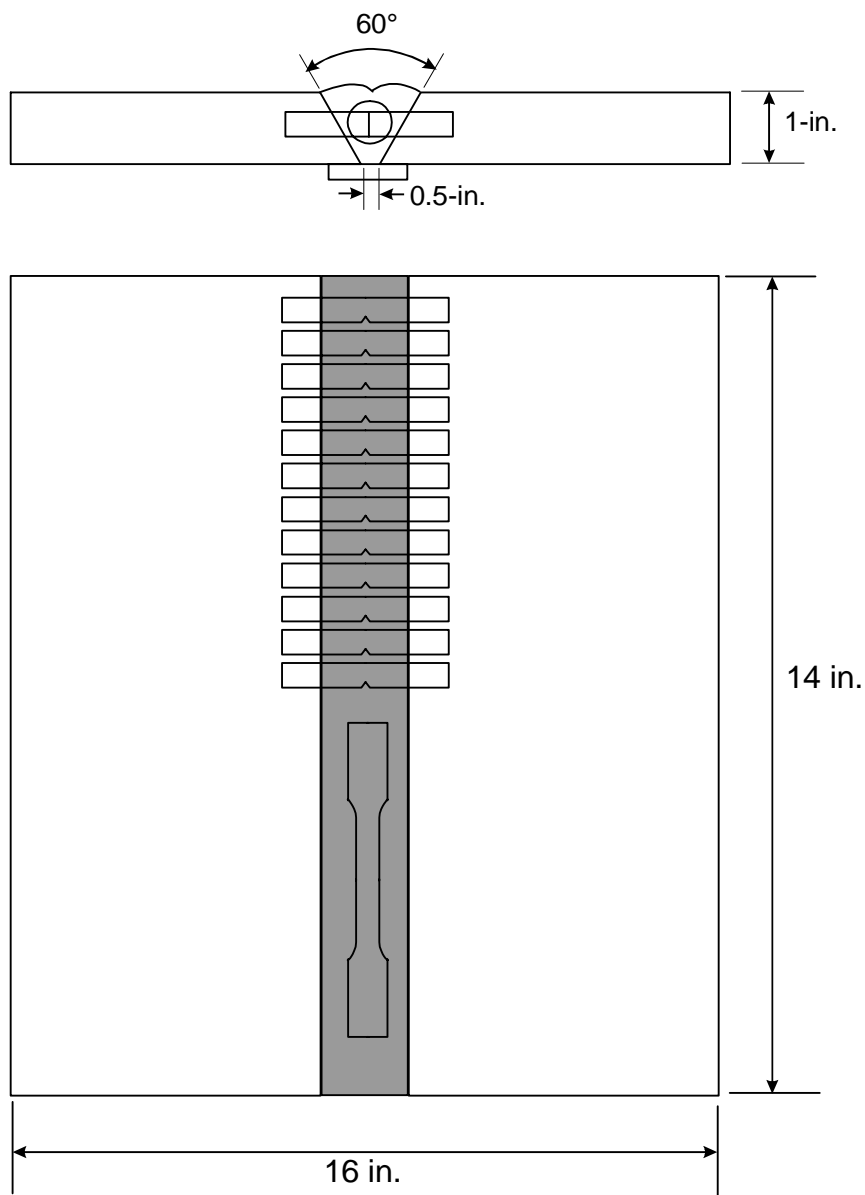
Groove Weld Joint Geometry, Test Plate Dimensions, and Sample Locations for the Mechanical Properties of Welds Deposited with a Wind Speed of 10 mph
